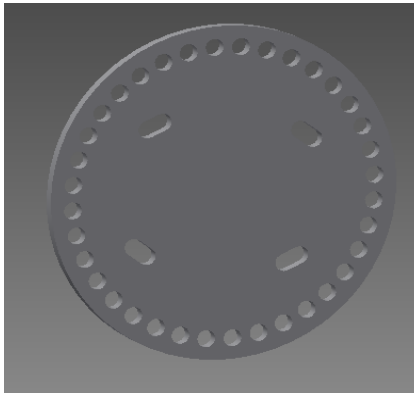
Base plate draft. CAD draft of the base plate for rotation in the mechanical system
